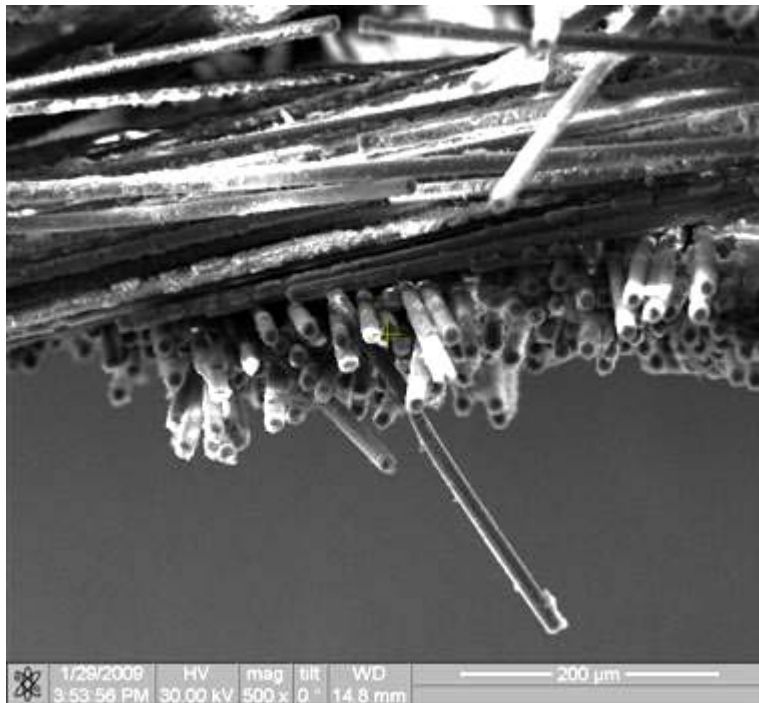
Fracture surface of the N720/AM specimen tested in tension to failure with constant loading rate of 25MPa at 1100°C in steam.
